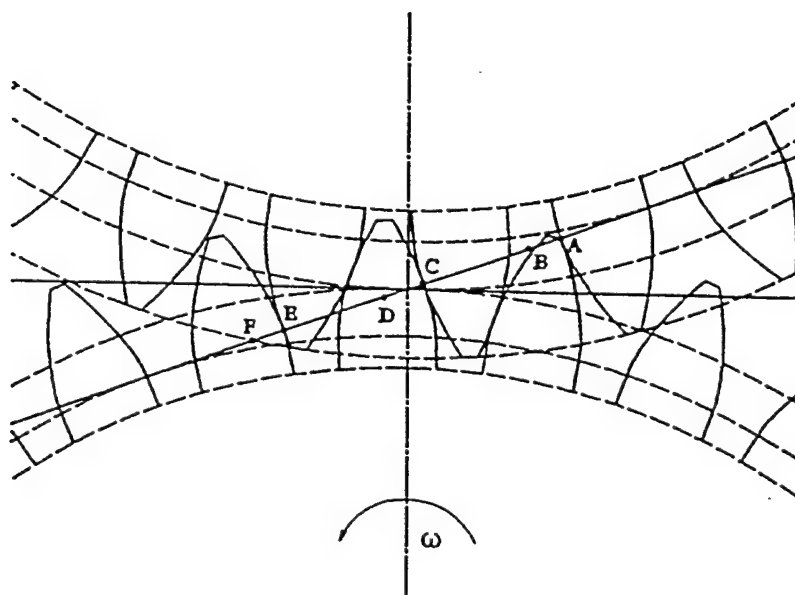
(b) Tooth contact in high-contact-ratio gear
